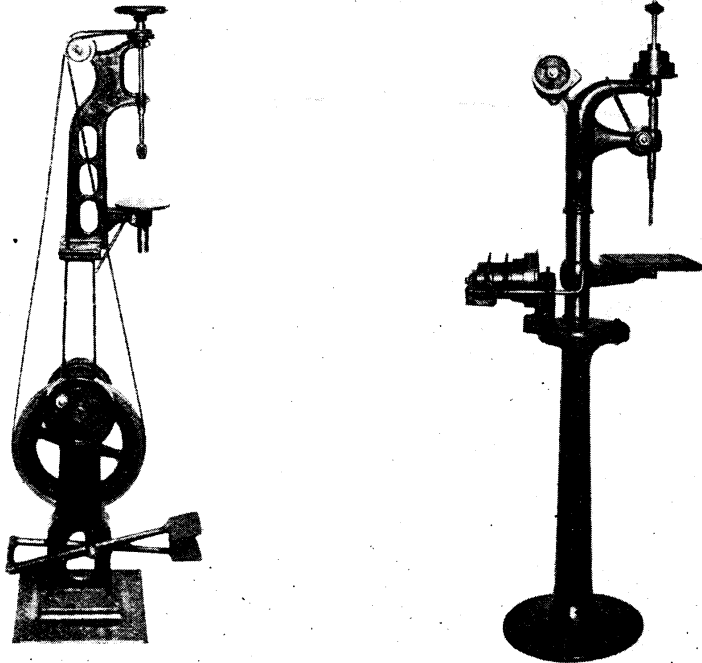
Treadles are fitted to this type of drilling machine, which is driven by means of a geared flywheel. Fig. 15. Pillar drilling machines are very useful, especially when there is a source of power. This sensitive type has three-speed gear, and occupies very small space
